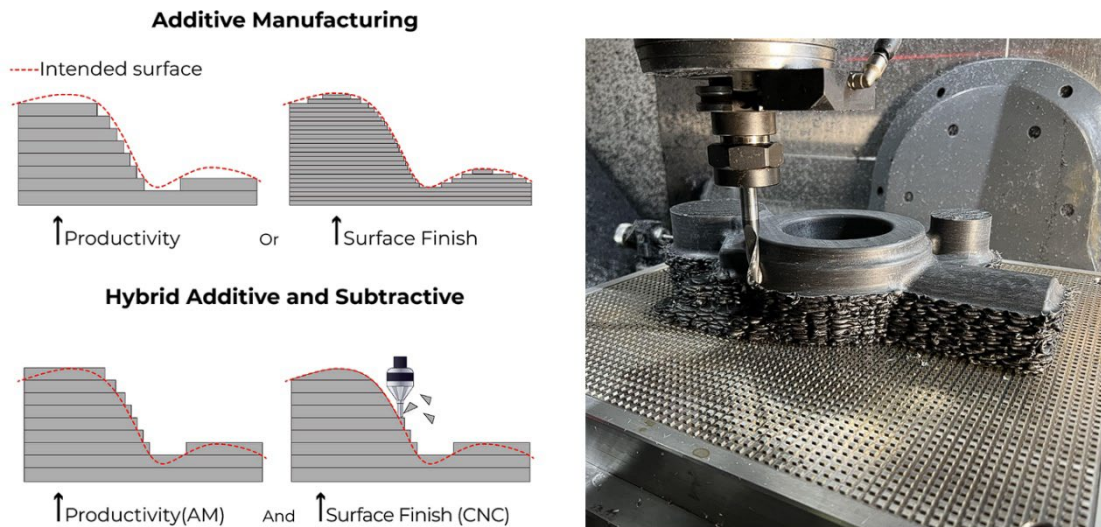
Hybrid additive and subtractive (machining) manufacturing processes allow for high productivity while meeting part surface finish and dimensional accuracy requirements.
